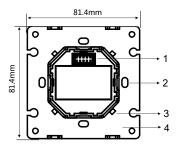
Dimensions - Front View 图 2. 尺寸图 - 正面
